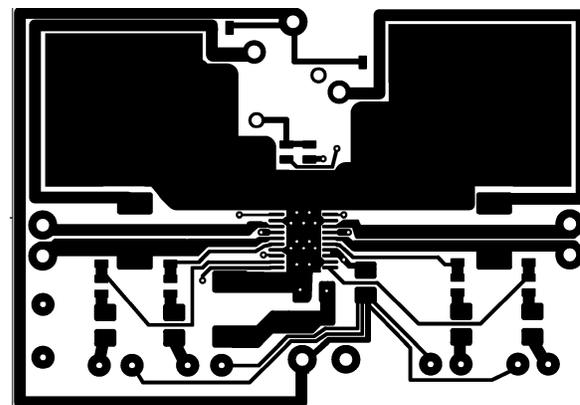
Recommended MTE PC Board Layout: Component-Side Layout
